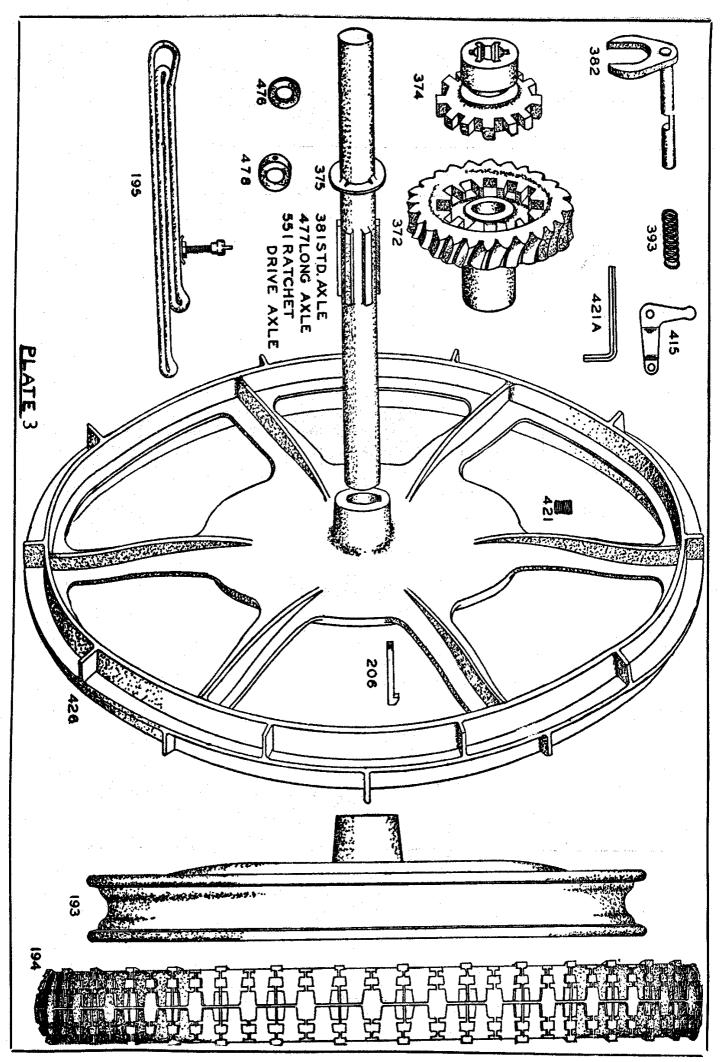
No. PER MACHINE PART No. DESCRIPTION 193 2222 Road wheel (key fitting) 194 Outer cover 195 Inner tube 206 Key for road wheel No. 193 372 Worm wheel 374 Driven dog 375 Tab washer for axle 381 Axle (for key fitting wheels) 382 Bridle 393 Spring for bridle 415 Bell crank 421 Set screw for road wheel (key fitting) 426 Road wheel (cast iron tread) 477 Long axle 3 ft. 478 Collar for long axle 551 Axle for ratchet drive
